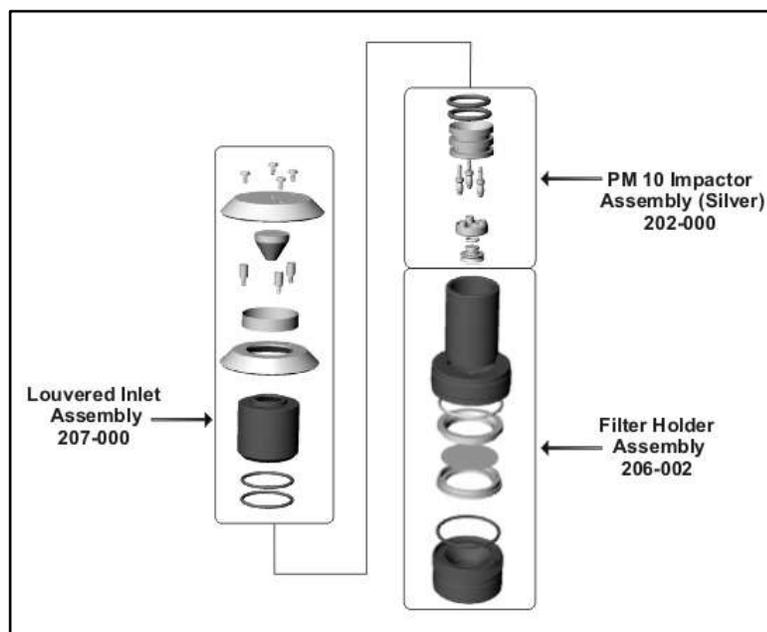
PM10 Impactor/Filter Holder Assembly
